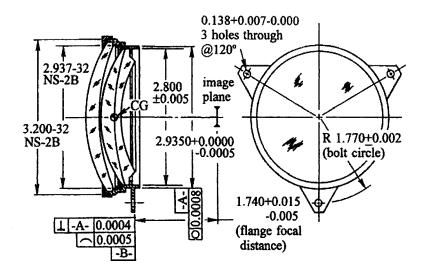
Sectional and frontal views of a triplet infrared sensor assembly. Dimensions are in inches. (Courtesy of Goodrich Corporation, Danbury, CT.)
